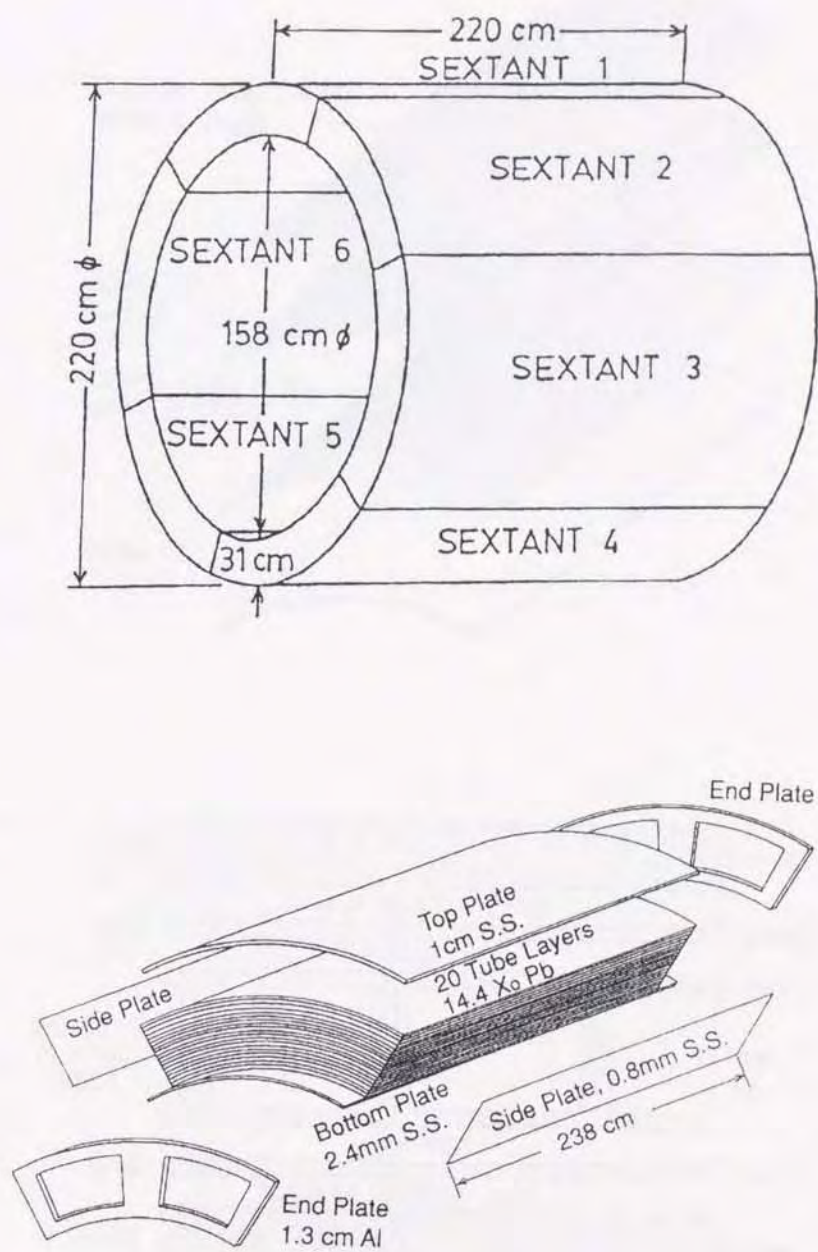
The Electromagnetic Shower Counter with the overall dimensions, and an exploded view of one sextant.
